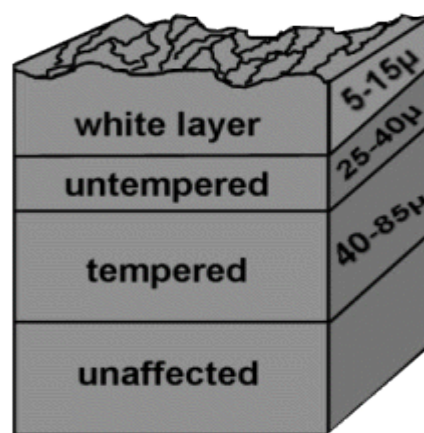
EDM layer zones. [Badger Metal Tech, Inc.]
